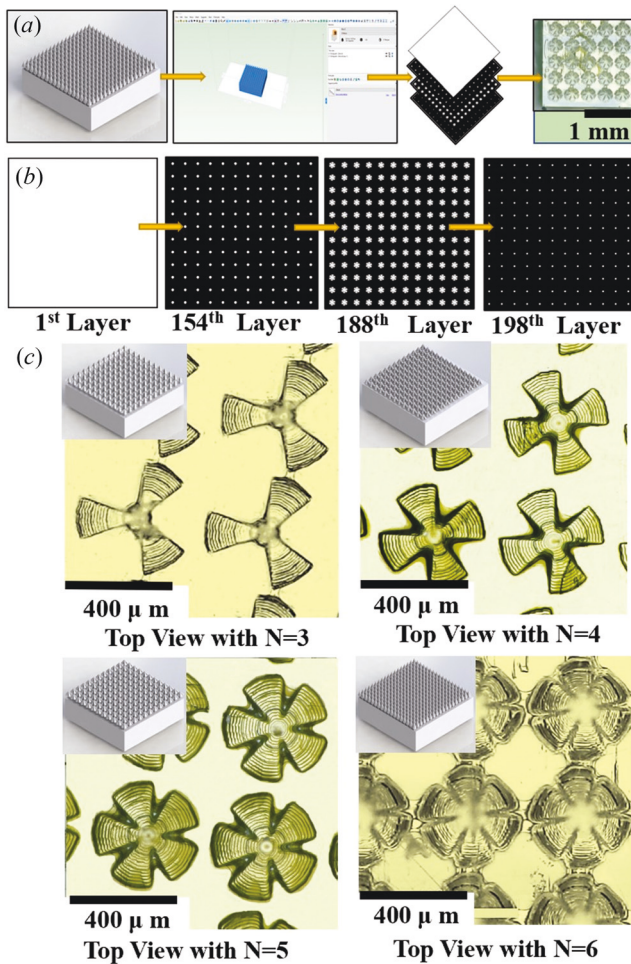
Manufacturing of springtail inspired microstructure. (a) Design of Springtail inspired surface which was used for slicing the CAD file, and microscopic image of the printed surface with springtail inspire microstructure. (b) Images after slicing the CAD file of the surface with springtail inspired microstructure (spike number, $N=6$). (c) Microscopic images of the 3D printed surfaces with various number of spikes from $N=3$ to $N=6$.
